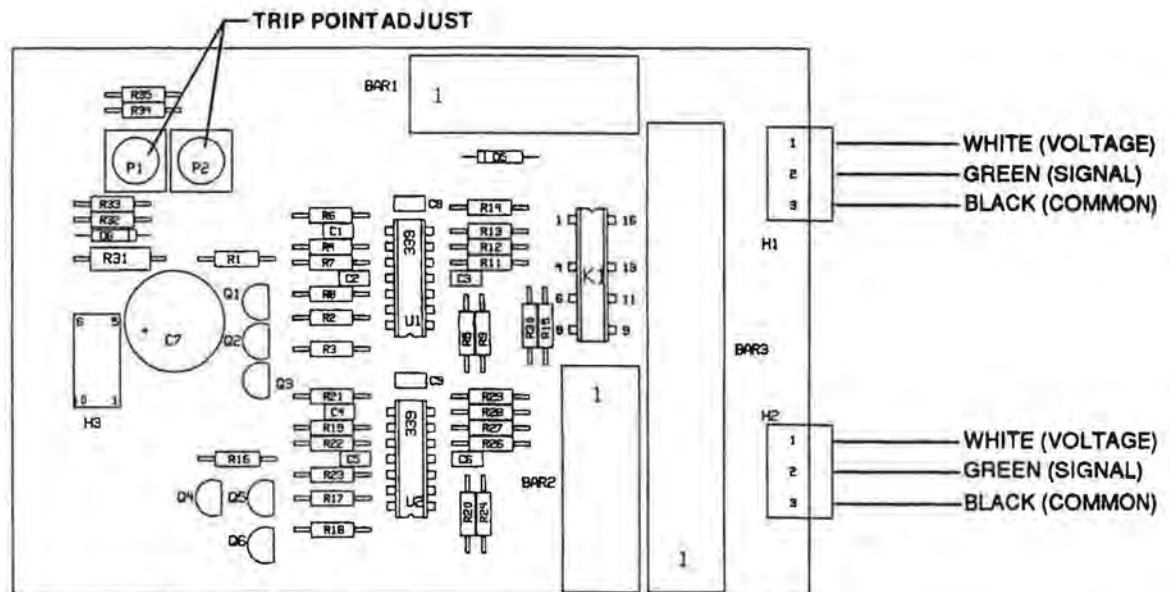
LVH VAPOR SENSOR INTERFACE BOARD P/N Q-439925
